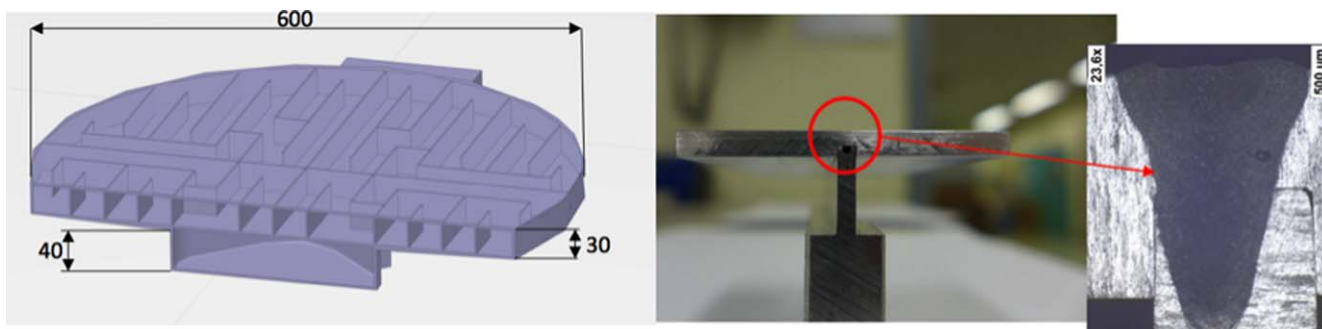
Electron-beam welding parameter test on the thermal moderator through-weld.
